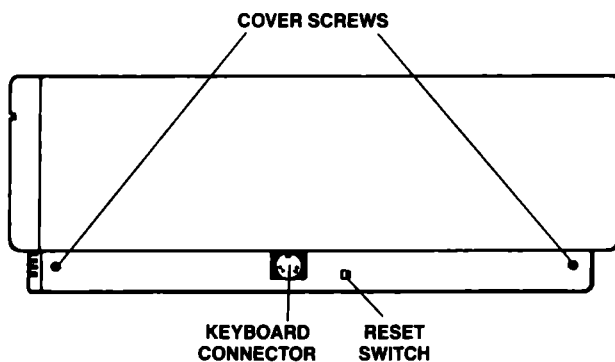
COMMODORE PC10/PC20 — RIGHT SIDE VIEW
